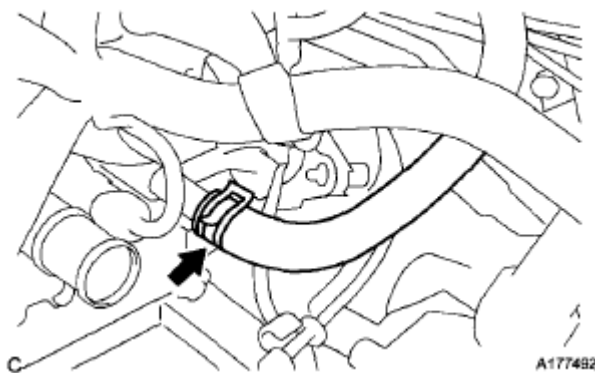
Identifying No. 1 Fuel Pipe Clamp
